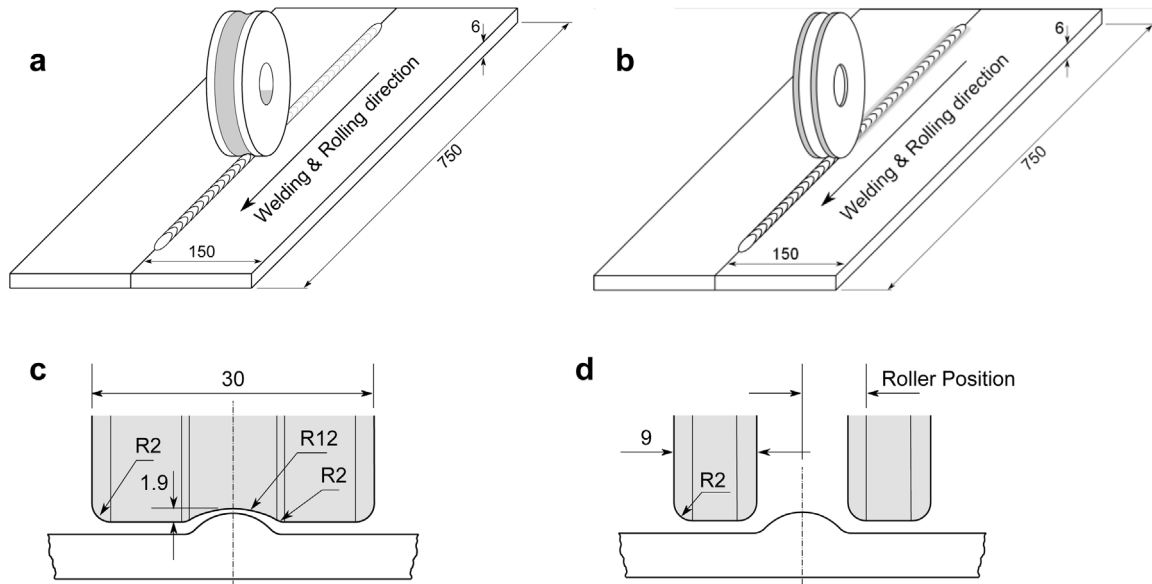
Geometry and rolling methods for (a) rolling on top of the weld bead and (b) rolling beside the weld bead with the dual flat rollers; (c) roller dimensions used for rolling on top of the weld bead and (d) parameterised roller dimensions for rolling beside the weld bead (dimensions in mm).
